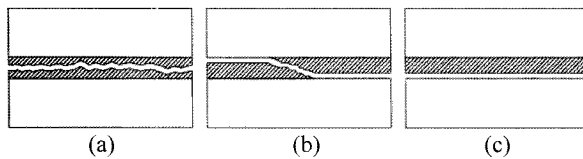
Typical failure modes of adhesive joint: (a) bulk failure; (b) transition failure; (c) interfacial failure.
